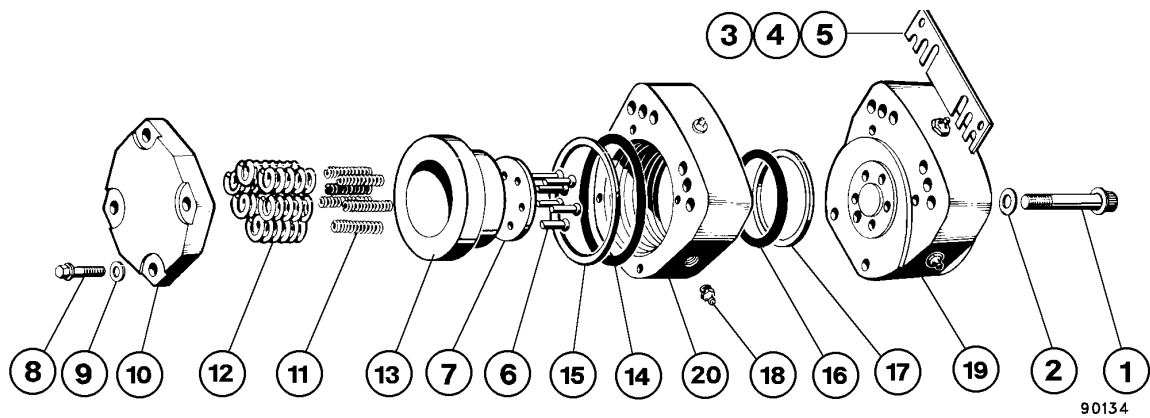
DISC PARKING BRAKE ASSEMBLY
